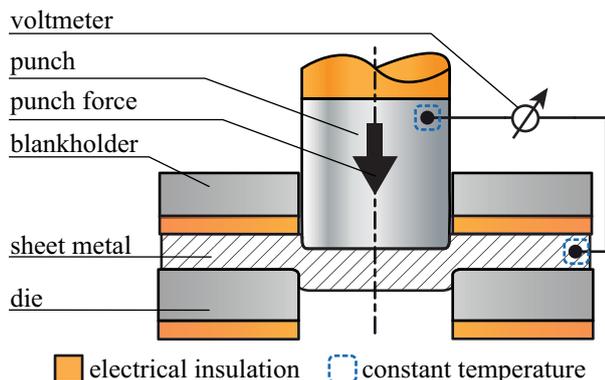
Schematic drawing of a tool-workpiece-thermocouple for temperature measurement during embossing and blanking operations
